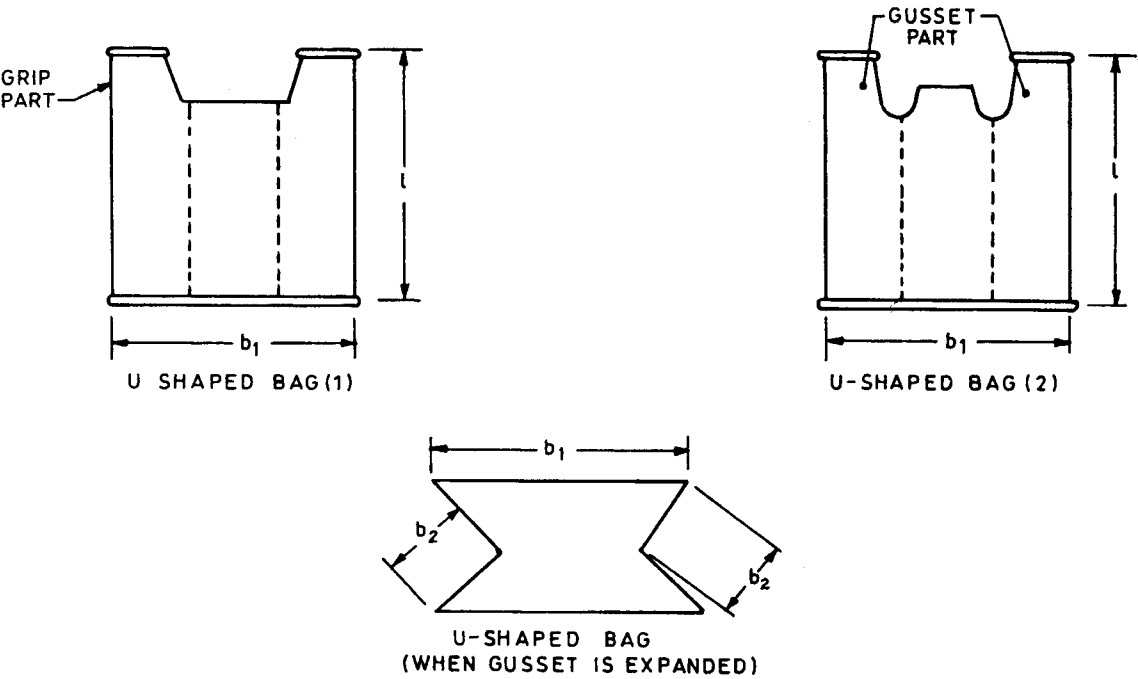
U-SHAPED BAG GUSSETED TYPE
